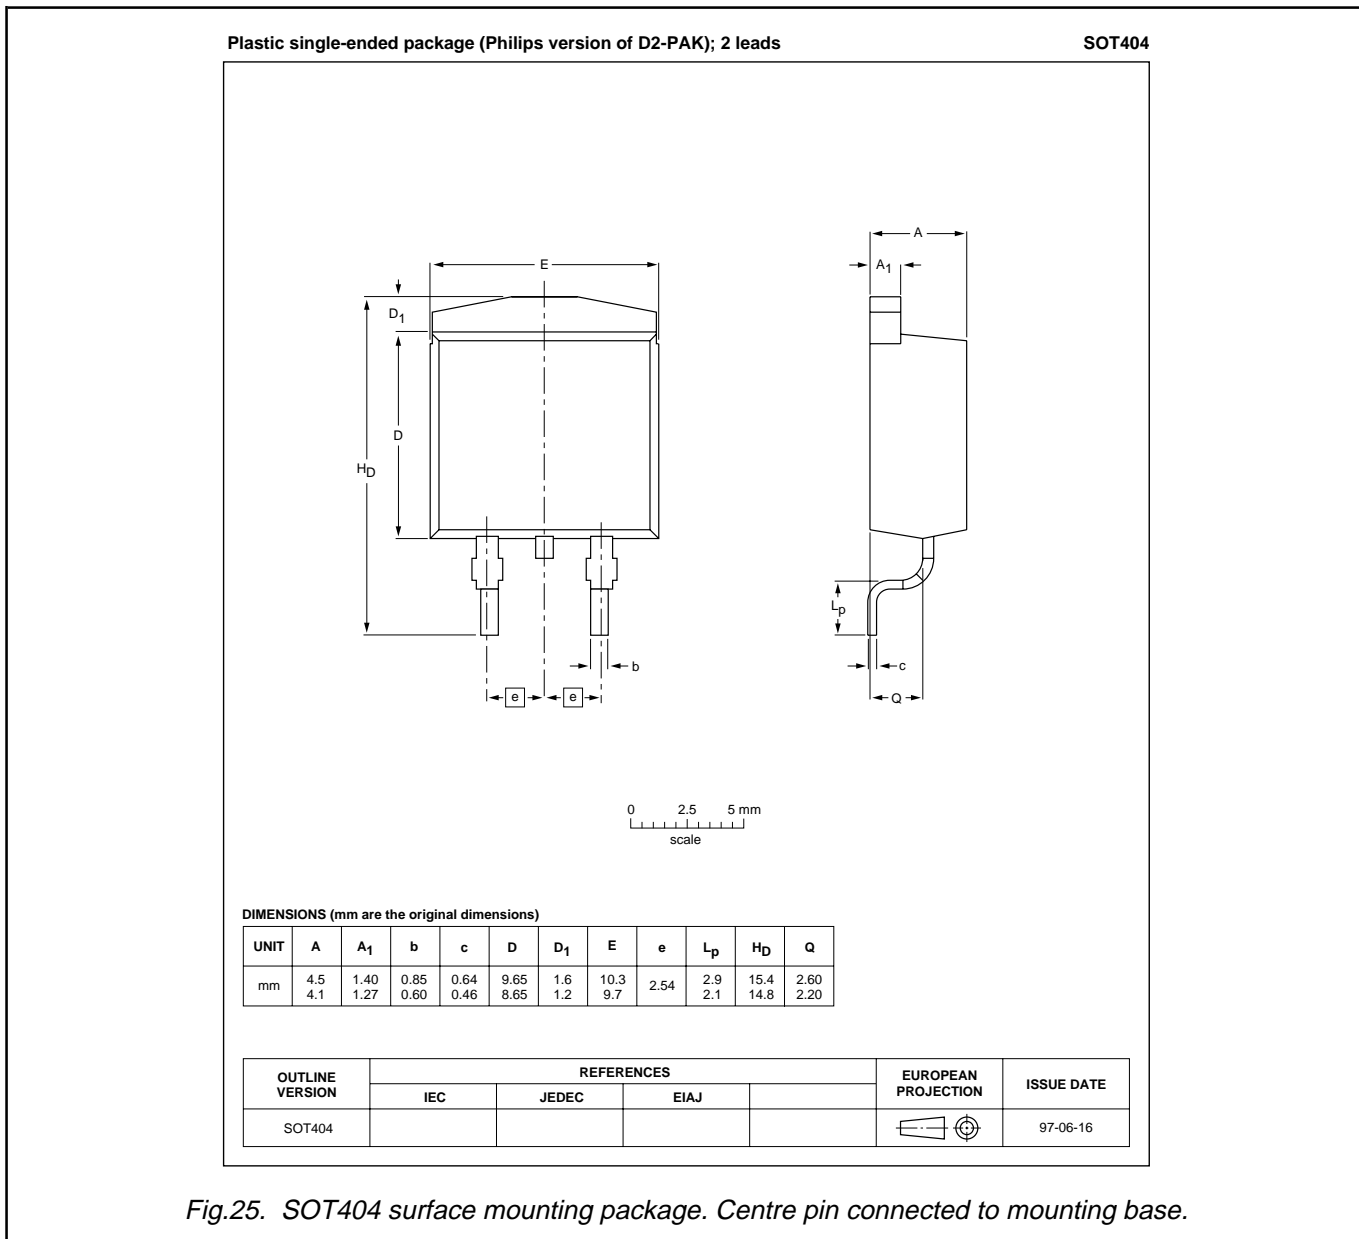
SOT404 surface mounting package. Centre pin connected to mounting base.
